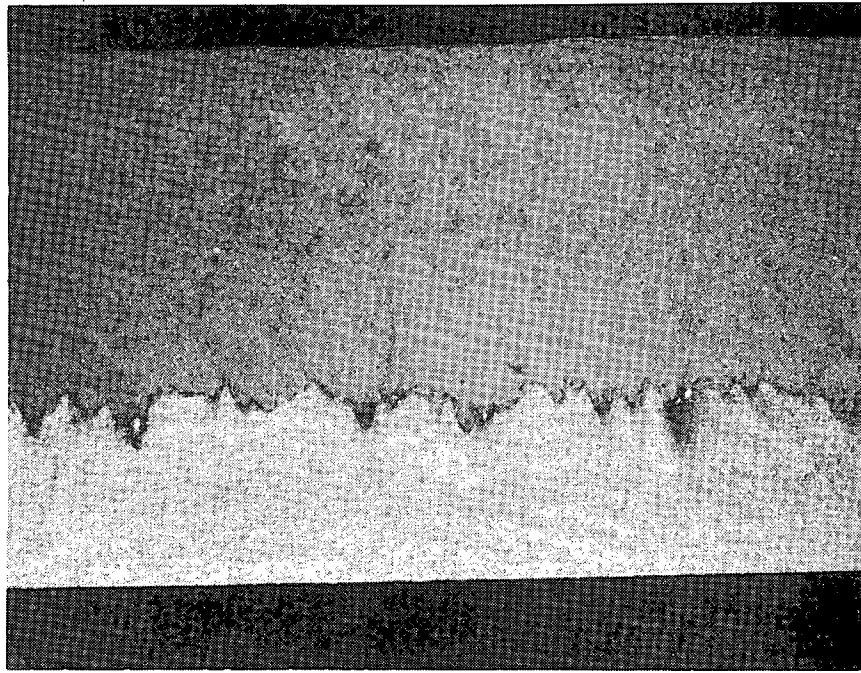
Longitudinal view of fractured surface of weld on 0.250-in. (0.635-cm) thick Mulberry. Weld parameters used were 140 kV, 10 mA, 30 in. (76.2 cm)/min, 0.060 in. (0.152 cm) ac deflection across the weld joint (11 X).
